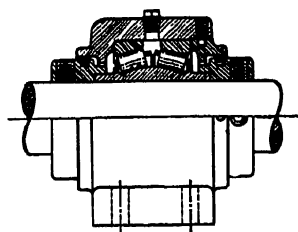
Hour-glass Type Roller Bearings and Pillow Block.
